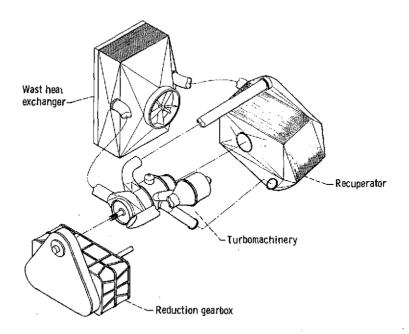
400-Horsepower, single-shaft bus engine components.
